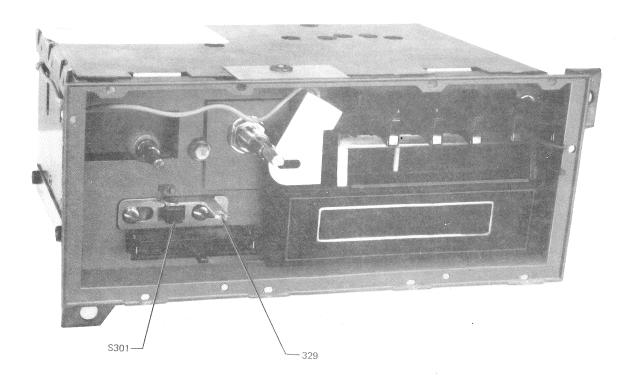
PARTS LOCATION, LENS ASSEMBLY REMOVED (3501458)
